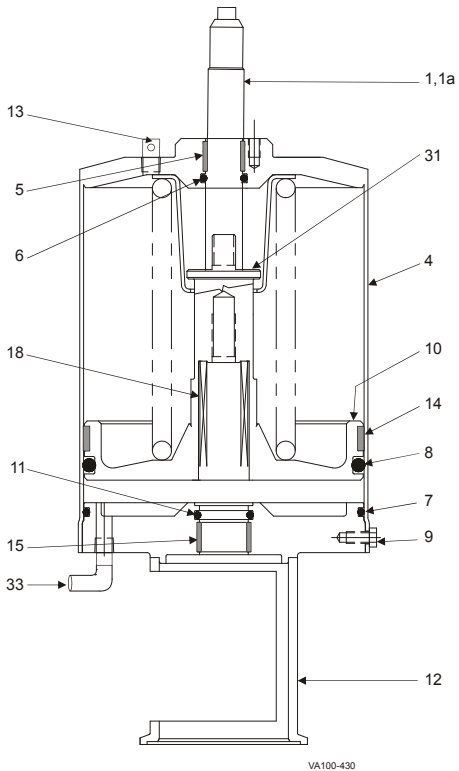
W71/W73 Actuator Assembly (Non-Seat Lift Valve)
